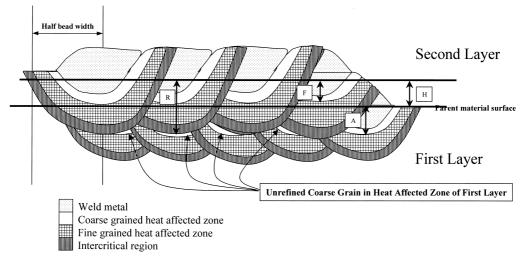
Temper bead welding. Second layer boundary depth (F); first layer fusion boundary depth (A) + average layer height of first weld layer (H); second layer refining depth (R).
